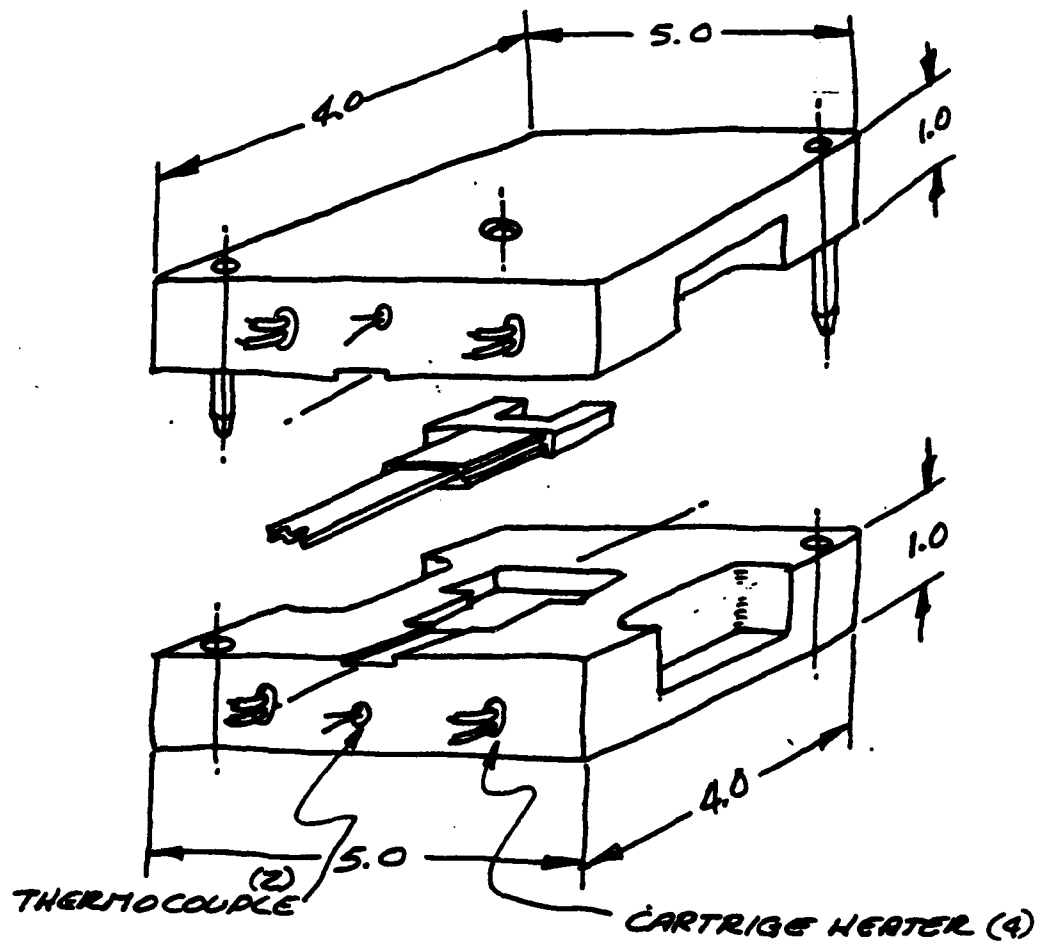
Concept/Specifications for Injection Molding Die (Cable Subassembly Cell)
